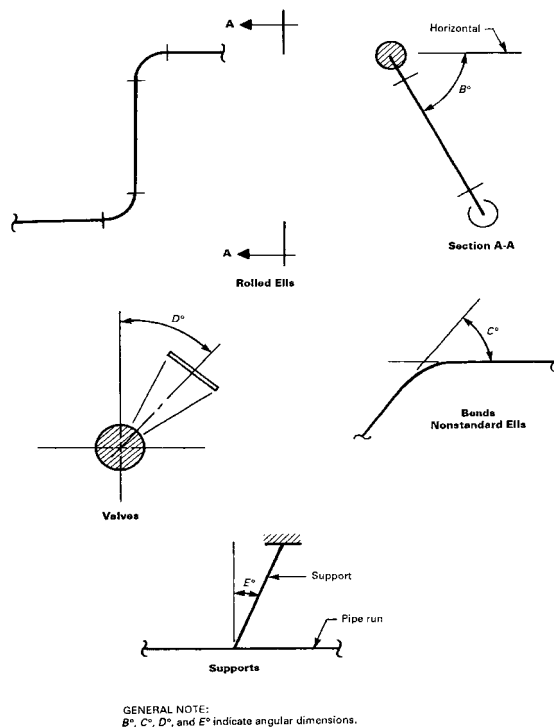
ILLUSTRATIONS OF ANGULAR DIMENSIONS — PIPE LEGS, VALVES, SUPPORTS, BENDS
